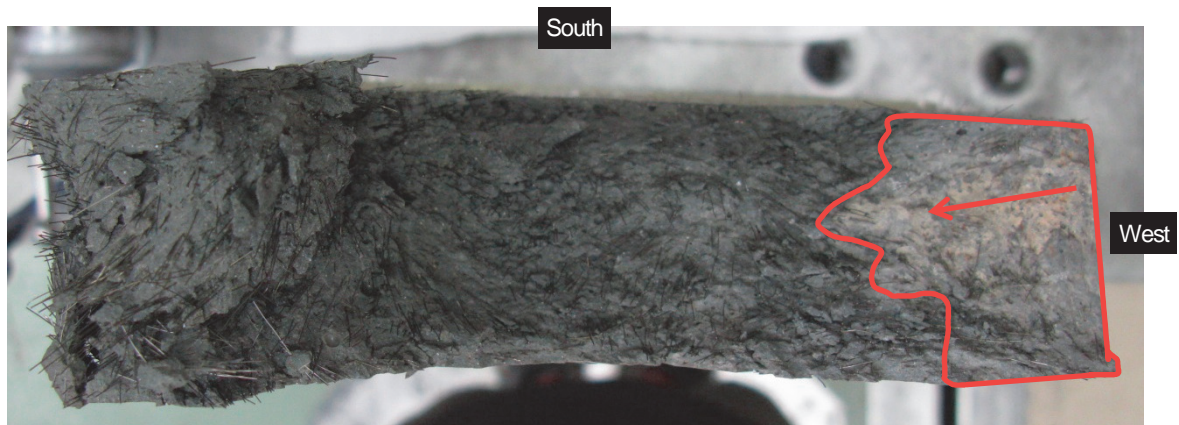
Fatigue fracture surface of S2.5-4 test specimen (lower half of the fractured specimen)
